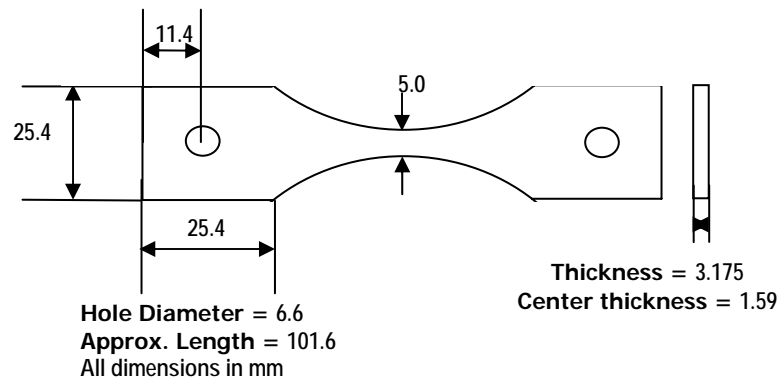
Schematic of Flat Tensile Specimen Geometry [1]
